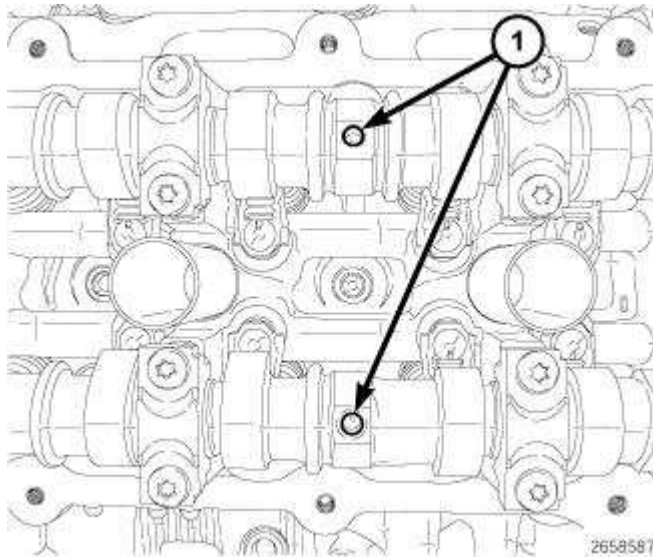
Positioning Camshaft Alignment Holes Vertically
